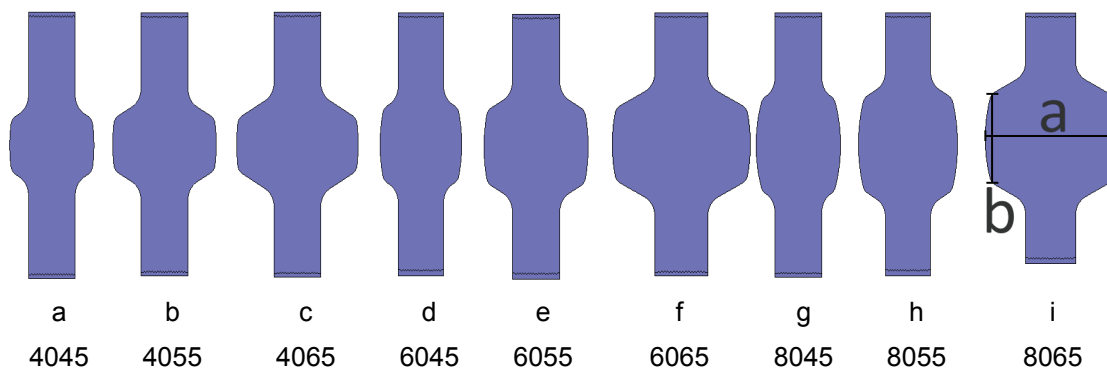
a-i) Shapes of specimen for investigating buckling behaviour of aluminium sheet metal
